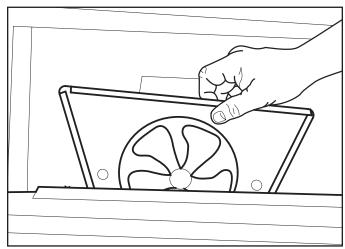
700BCI-3 & 700BFI-3 Evaporator Fan Assembly
